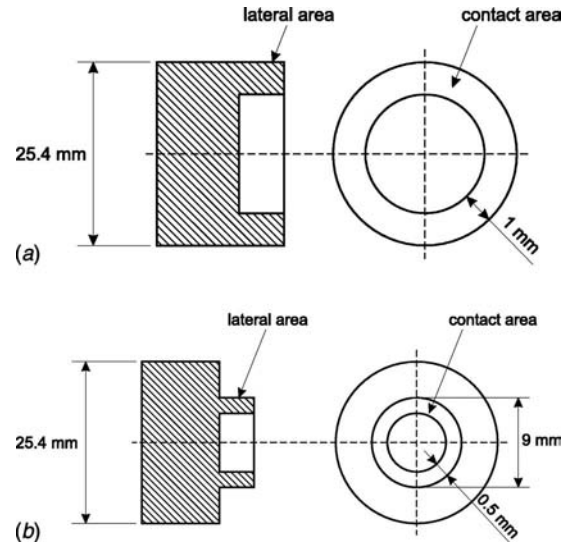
Drawing of the cup-shaped 1018 steel piece for (a) the case of large contact area and (b) the case of small contact area
